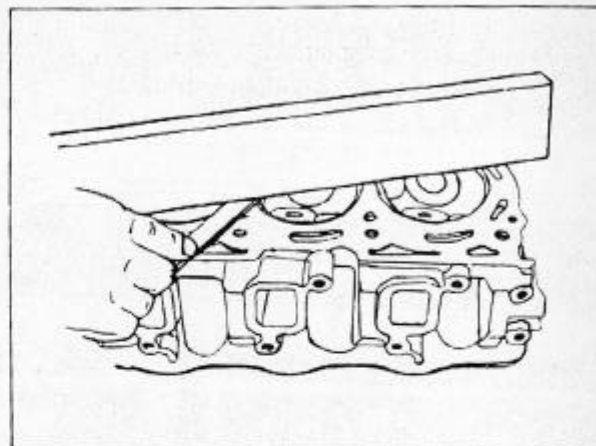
A-60 MEASURING OF CYLINDER HEAD
